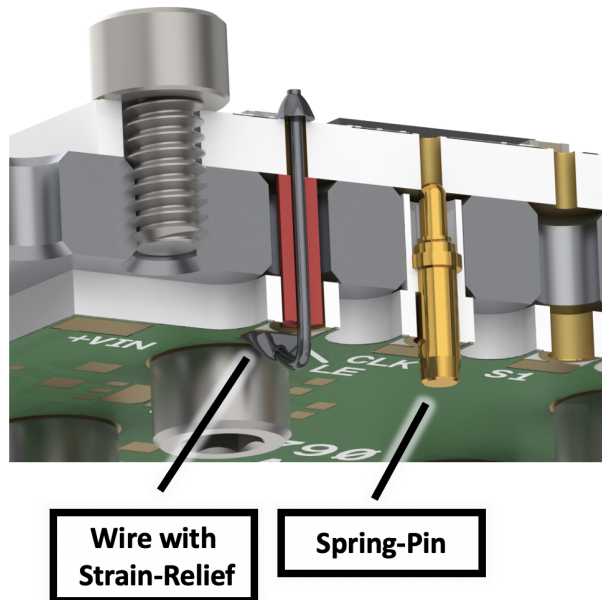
Cross-sectional view of an X-Microwave block, shown screwed onto the top of a breadboard. A bias and control board screwed to the bottom of the breadboard supplies biasing and/or control signals via a direct solder connection (left) or a solderless spring-pin connection fed through a hole in the breadboard to the bottom annulus of a via in the top X-Microwave block. The spring pin method is used exclusively for X-Microwave components in the X-band receiver. Image credit: Quantic X-Microwave.
